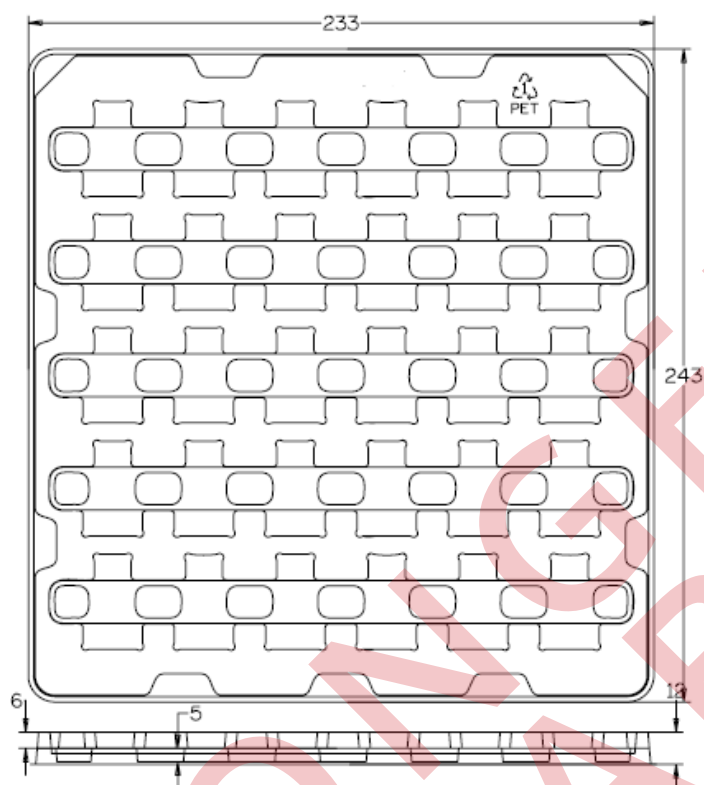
Package tray dimensions for LUXEON S5000 LXSx-Pxxx-0041(N).
